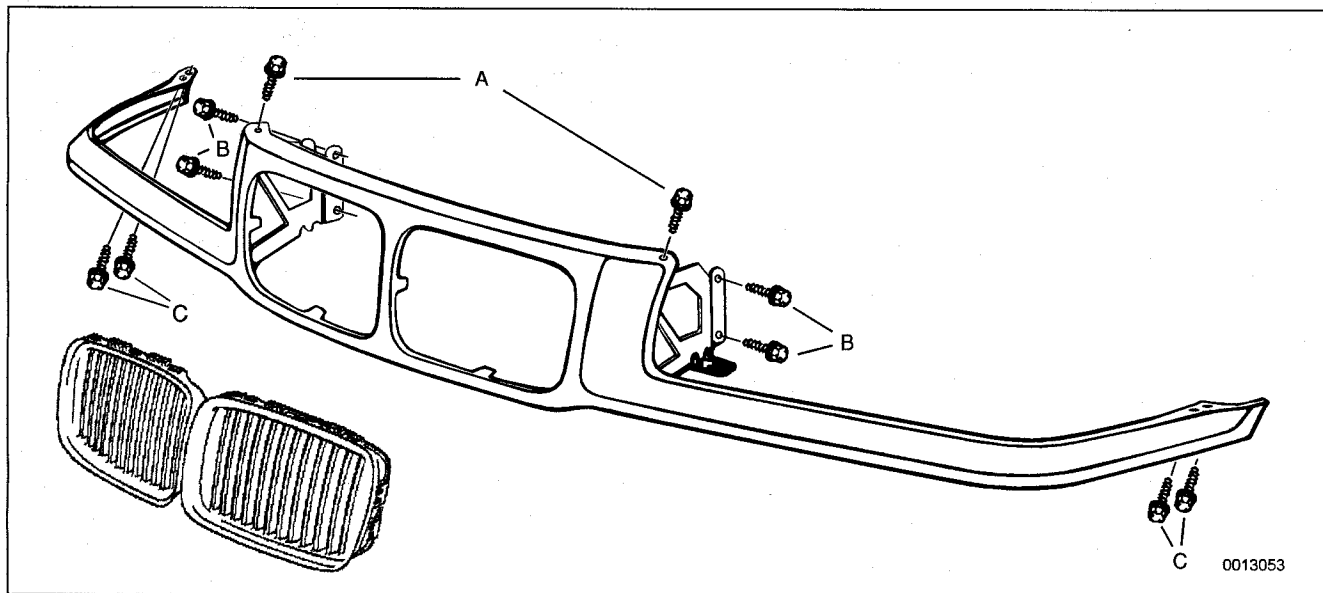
Front panel assembly. Note top retaining screws (A), retaining screws at radiator support (B), and side retaining screws (C).
